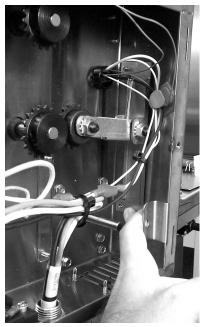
Use a 9/32 bit to drill out the bite hole in the cabinet. New screws, which will hold the spring-loaded idler, are provided for this position
